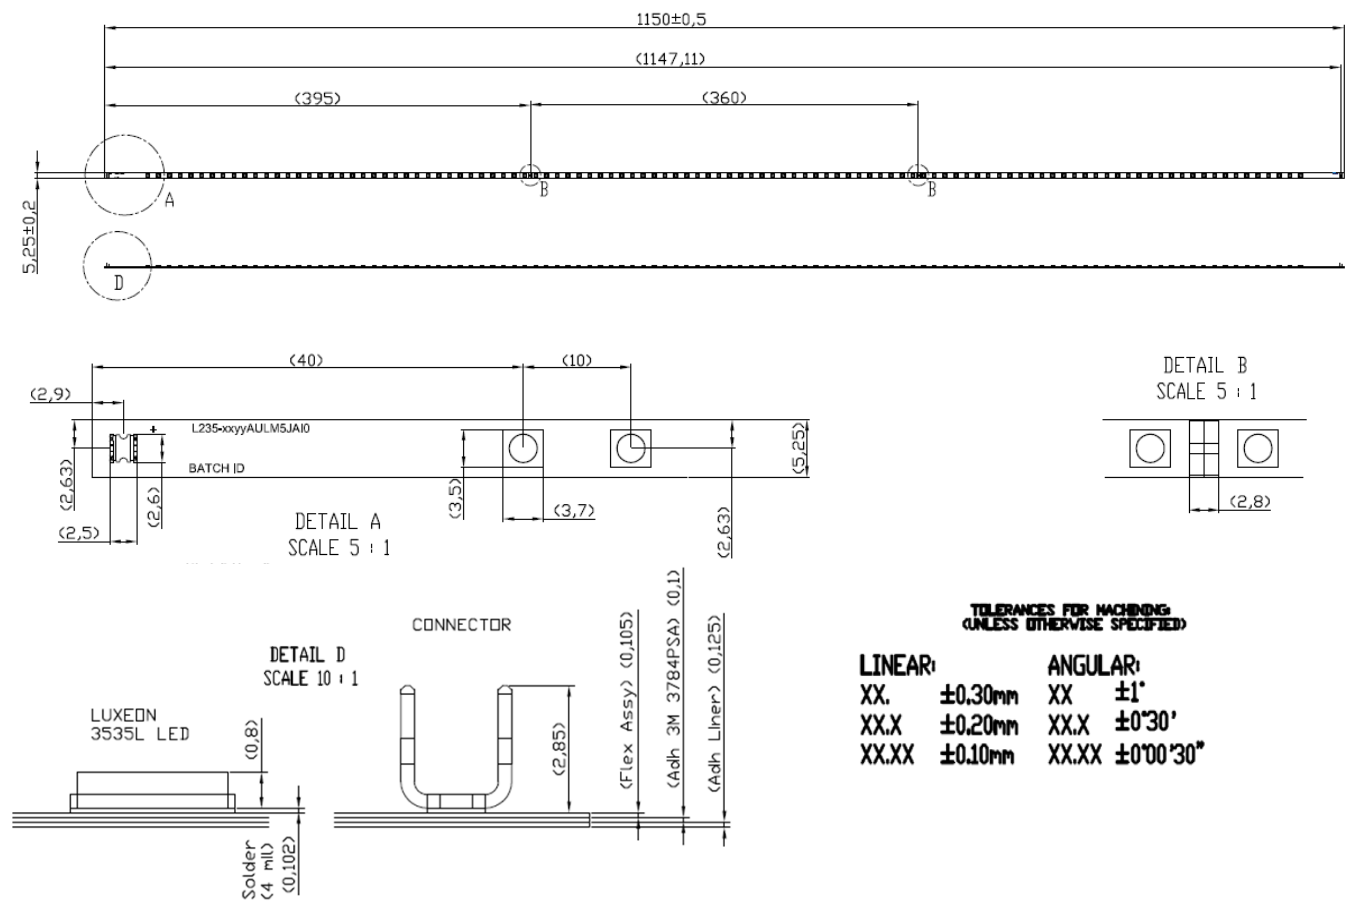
Mechanical drawing for L235-xyyyAULM5JAIO.
